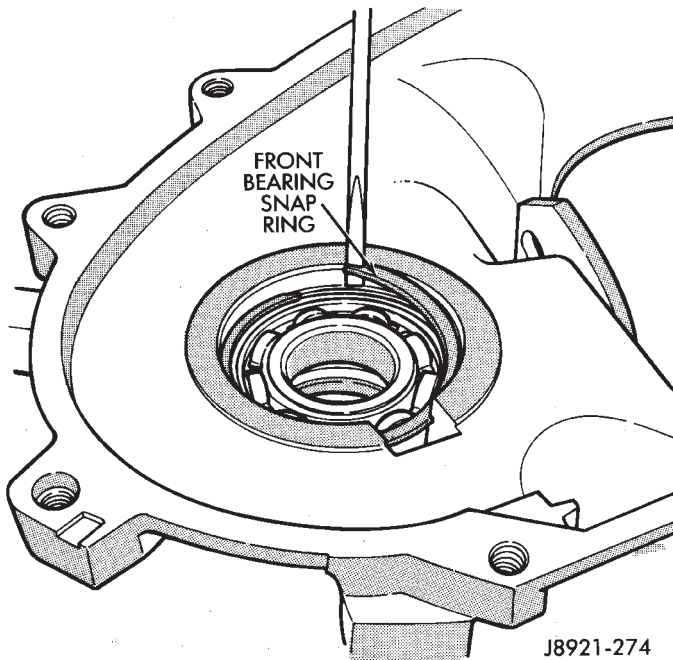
Front Output Shaft Front Bearing Snap-Ring Removal
